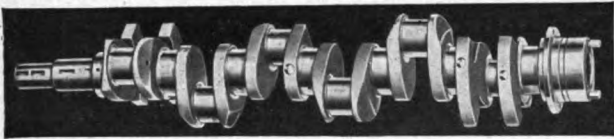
Crankshaft of a six-cylinder diesel engine.
